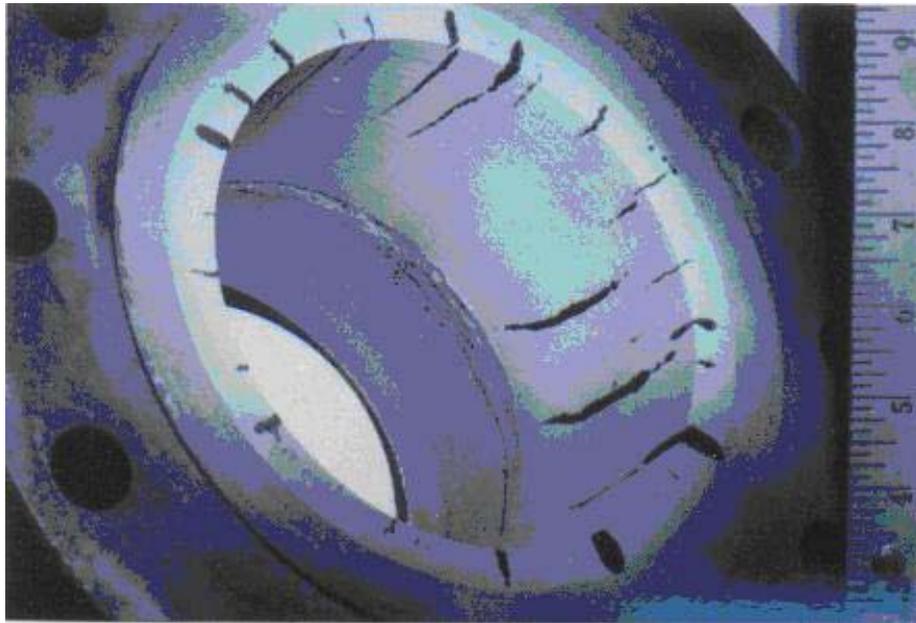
PT inspection of a type 304 stainless steel catalyst withdrawal line piping and weld neck flange.
